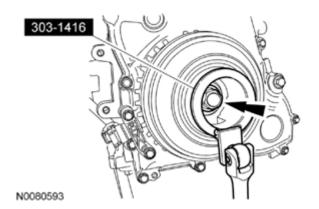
Locating Crankshaft Pulley Bolt Courtesy of FORD MOTOR CO.
